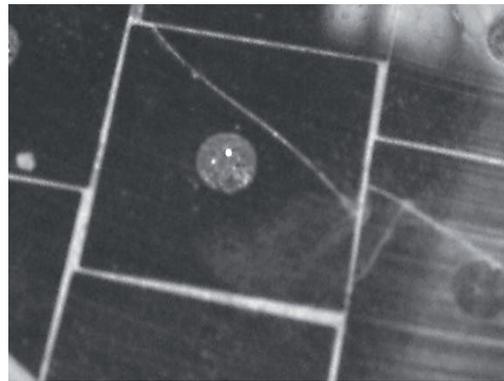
Cracks of WC-Co ISO K05 sinter plate, being the effect of too small thickness of a WC-Co ISO K05 sinter – Cu brazing filler metal – 14-5 PH steel joint; a view from above
